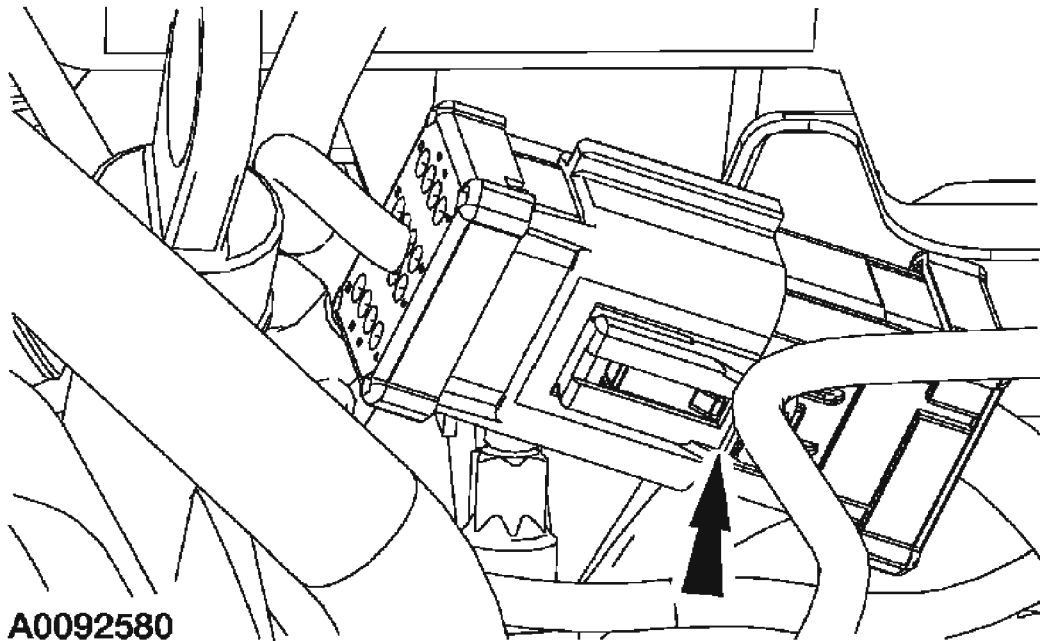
Connecting Fuel Charging Wiring Harness Electrical Connector
